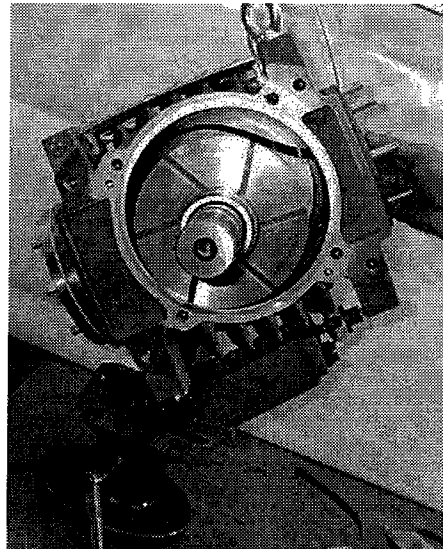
Check the radial clearance "S" (see chap. 3.3)
